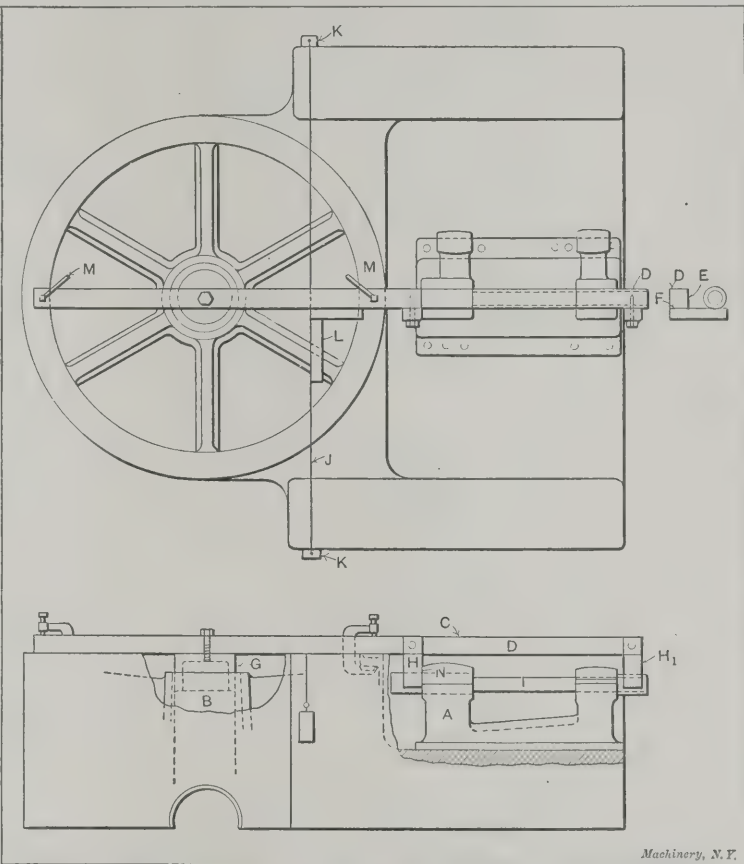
Gage for Aligning the Driving Shaft Bracket on a Vertical Boring Mill of the Bevel Gear Driven Type
